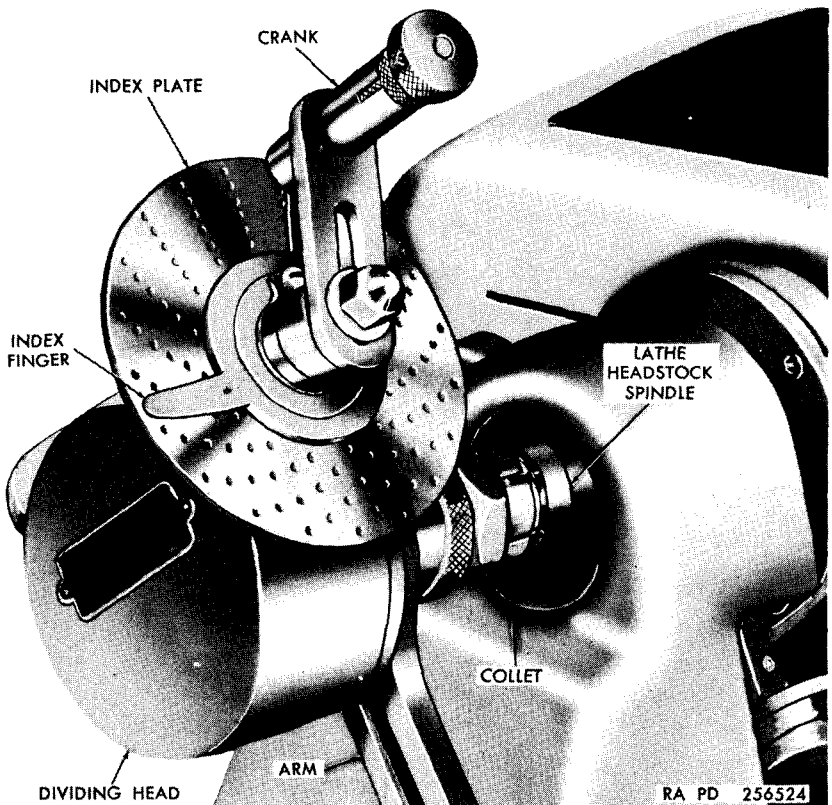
Dividing head of the milling and grinding lathe attachment installed on the lathe.
